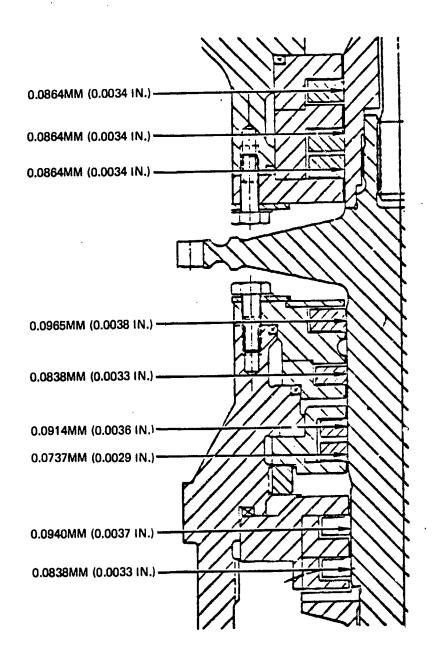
Mark 48-0 Turbopump S/N 03-0 Seal Diametral Clearances
